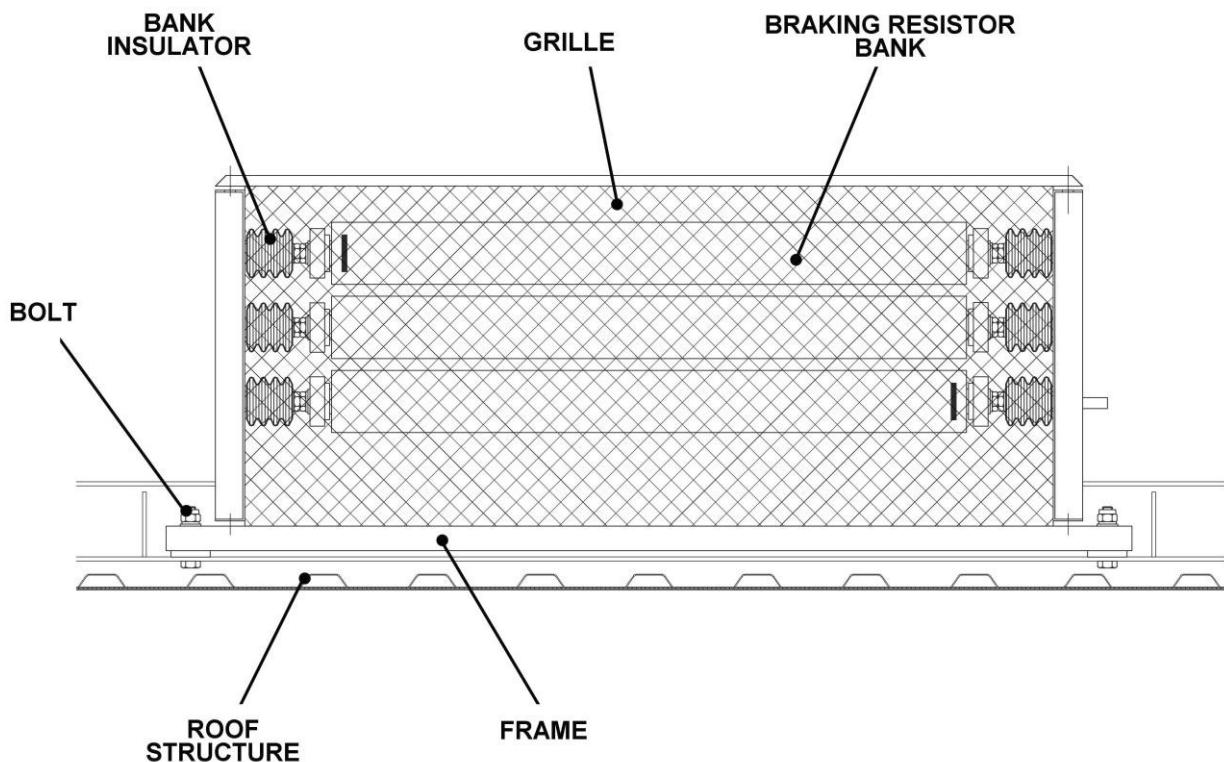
BRAKING RESISTOR COMPONENTS -FRONT VIEW
